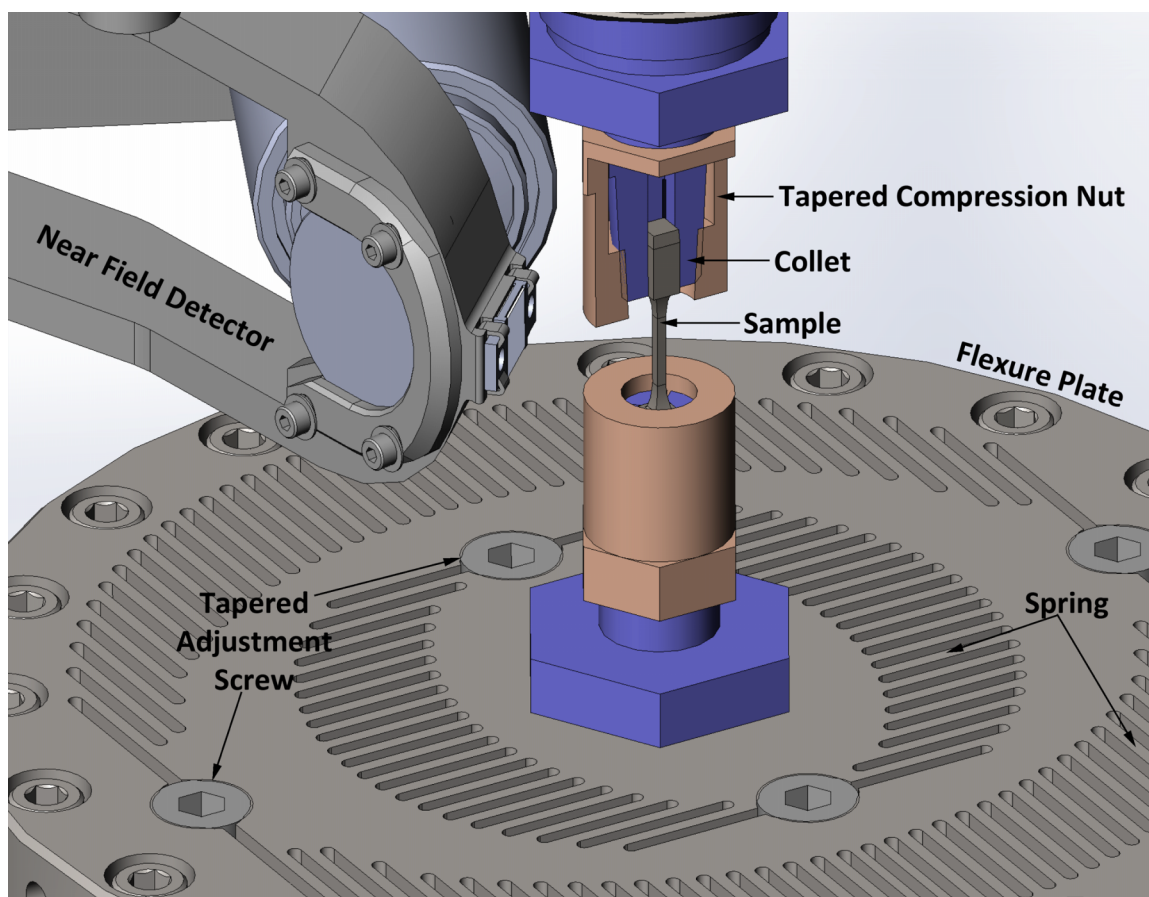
Detailed schematic of the sample grips and lower flexure plate utilized in the RAMS load frame insert, with the upper grip shown in section view to reveal the internal details. The grips were designed to enable the near field detector, which is also shown, to be positioned as close as 5 mm from the sample. The flexure plates allow the upper and lower sample grips to be independently aligned to the rotation axis.
